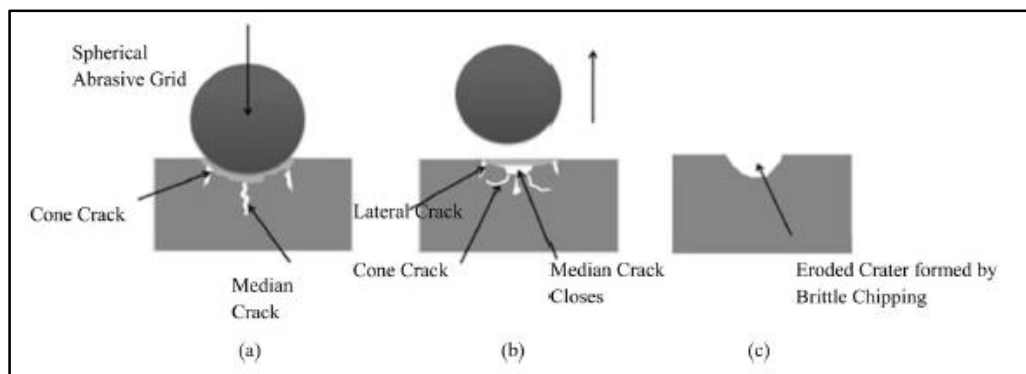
Erosion Mechanism in Brittle Material: (a) Creation of Cracks, (b) Growth of Cracks and Division of Surface into Smaller Pieces, and (c) Eventual Material Removal [6].
